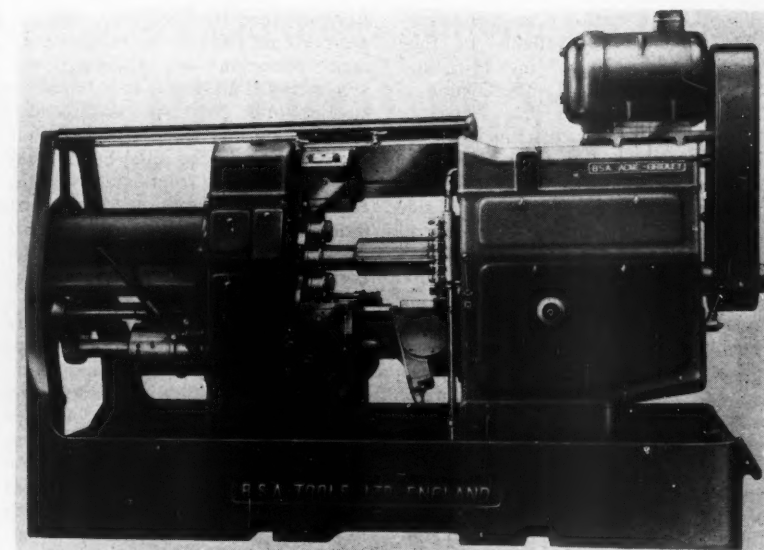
B.S.A. Acme-Grindley six-spindle bar automatic.
